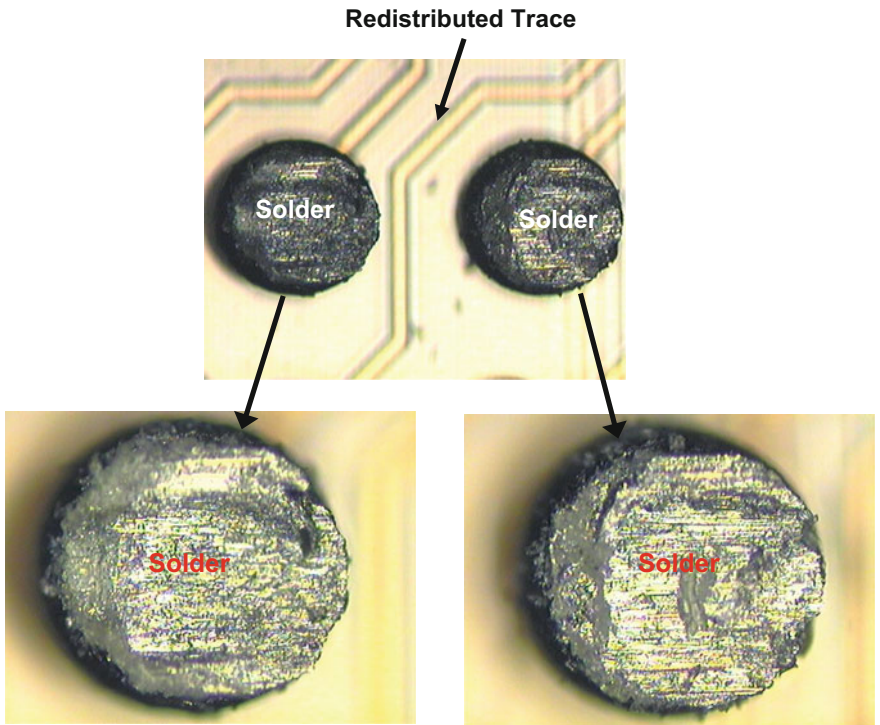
Shear fracture surfaces of WLCSP solder bumps
